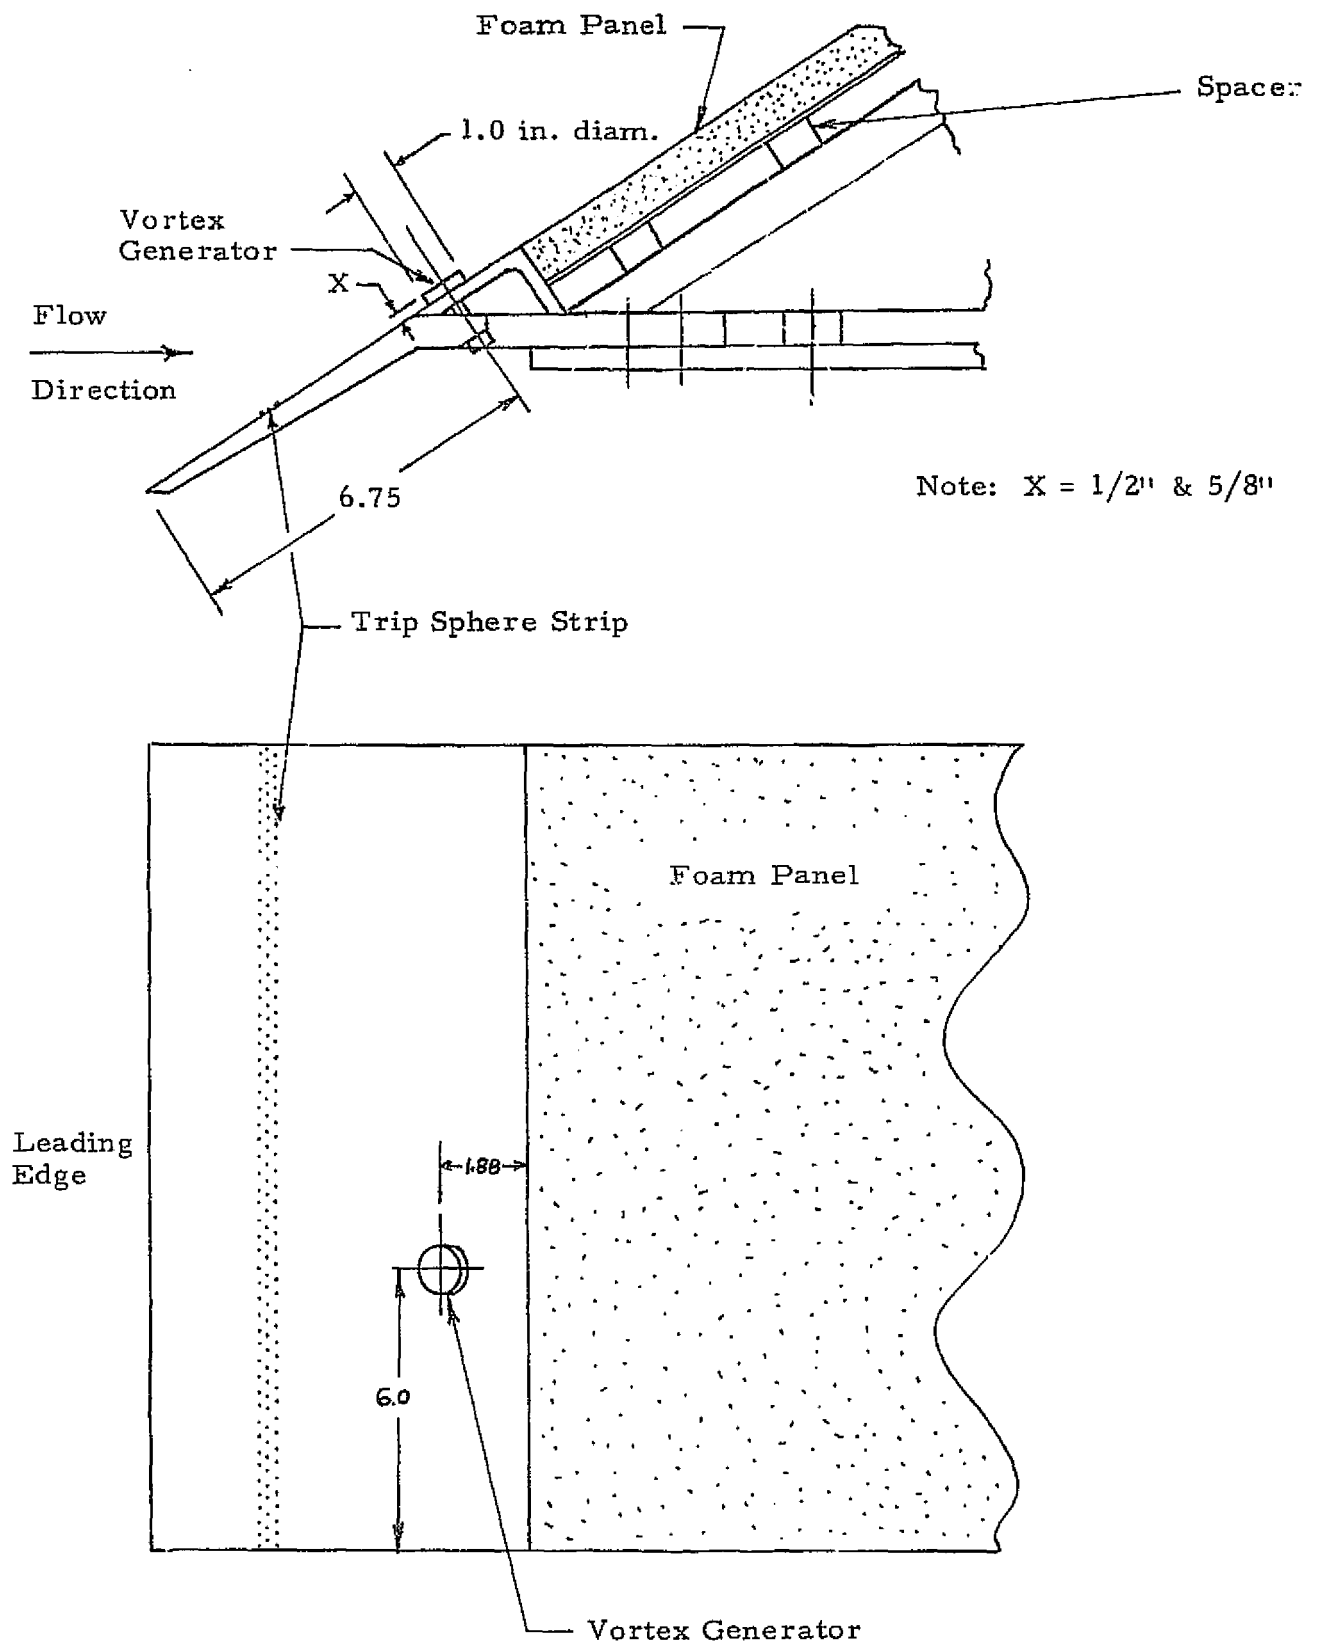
Sketch of Wedge-Fixture with Foam Panel Showing Vortex Generator Mounted on Stainless Steel Leading Edge
